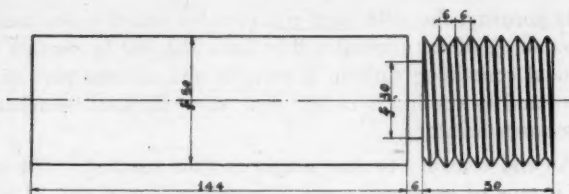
THREADED CAST IRON ROD—DIMENSIONS GIVEN IN MILLIMETERS
